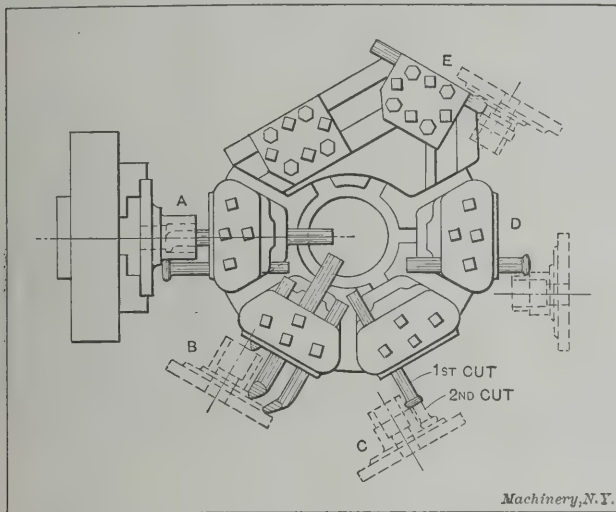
Lay-out of Tools on the Flat Turret Lathe for the Operation shown in Fig. 6
